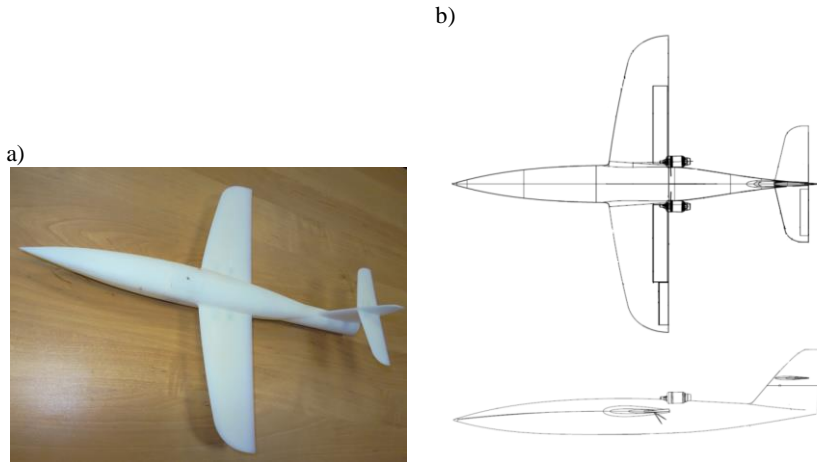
View (a) and drawing (b) OCP-Jet tested model
